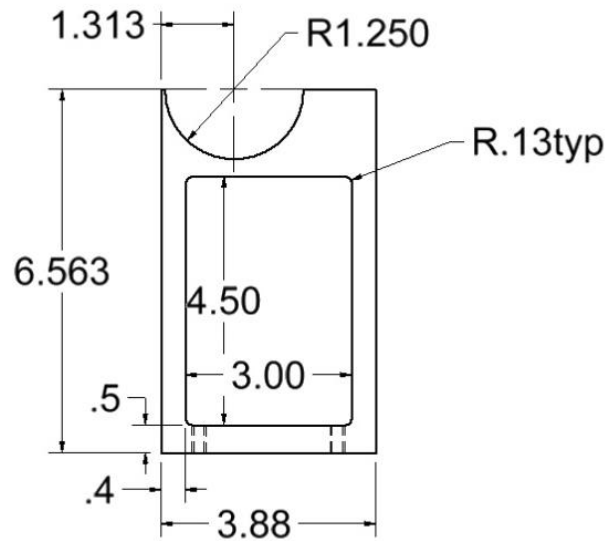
Mechanical drawing of dryer support front (Support Stand Item 3)
